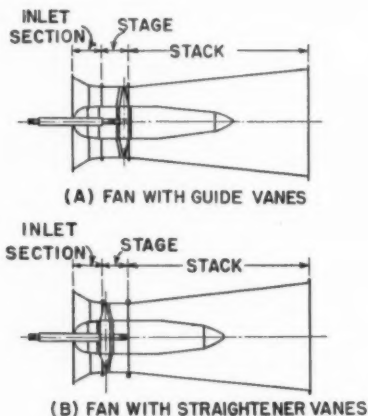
PRINCIPAL PARTS OF VANE-AXIAL FANS
